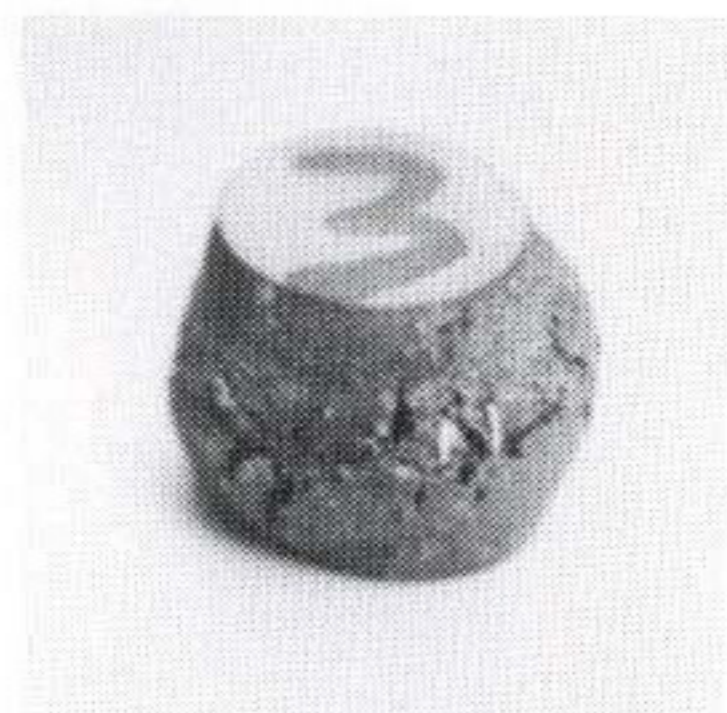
OM micrographs showing fracture behaviour after compressive test at 1100 °C
